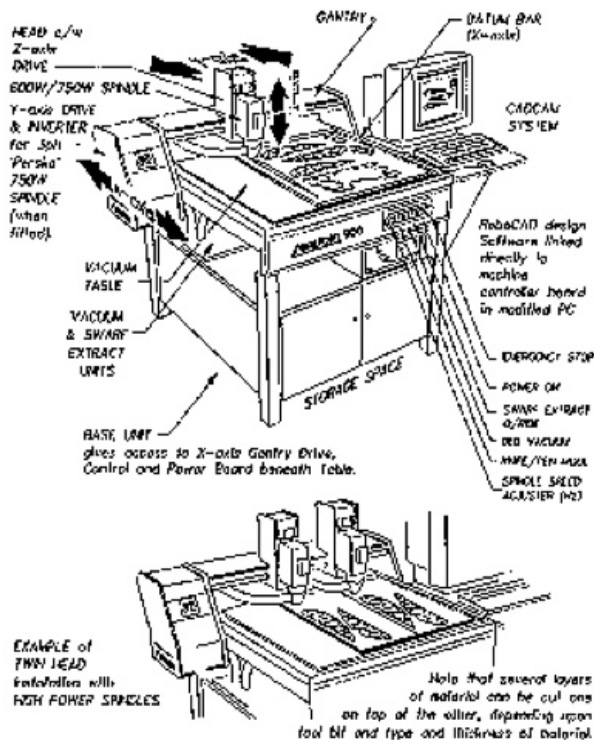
The Sequoia 900 machine, standard and twin-head versions
